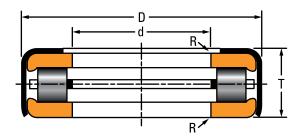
Type TTSP thrust tapered roller bearing assembly.
